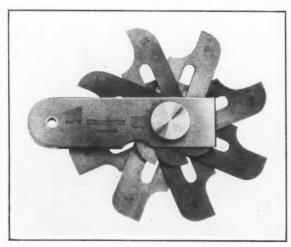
Brown & Sharpe Radius and Fillet Gage with Eight Blades
